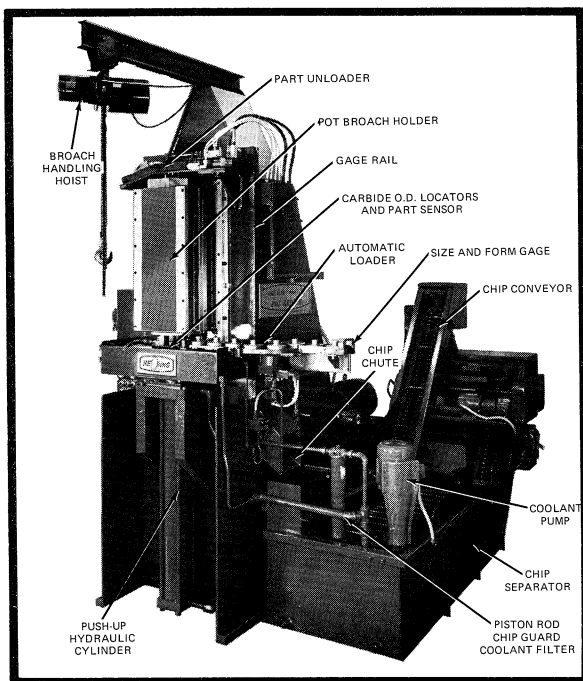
A 25-ton automated push-up pot broaching machine that can produce external gears, splines and tooth forms at rates up to 450 pieces per hour.
